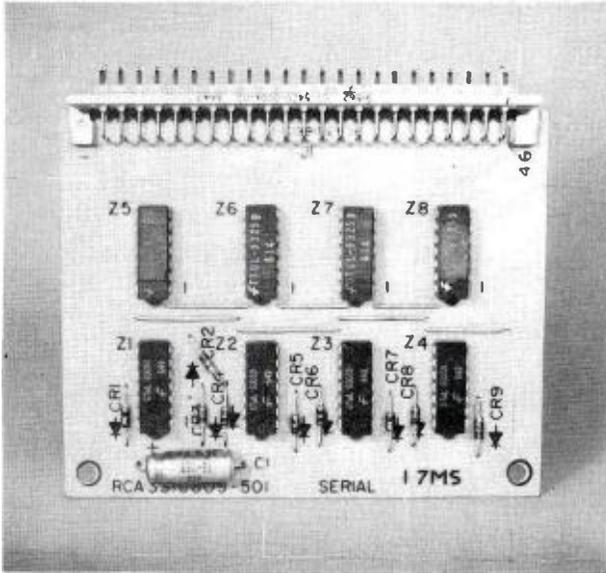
Front view of plug-in board showing integrated circuitry that contains up to 65 transistors per card.
